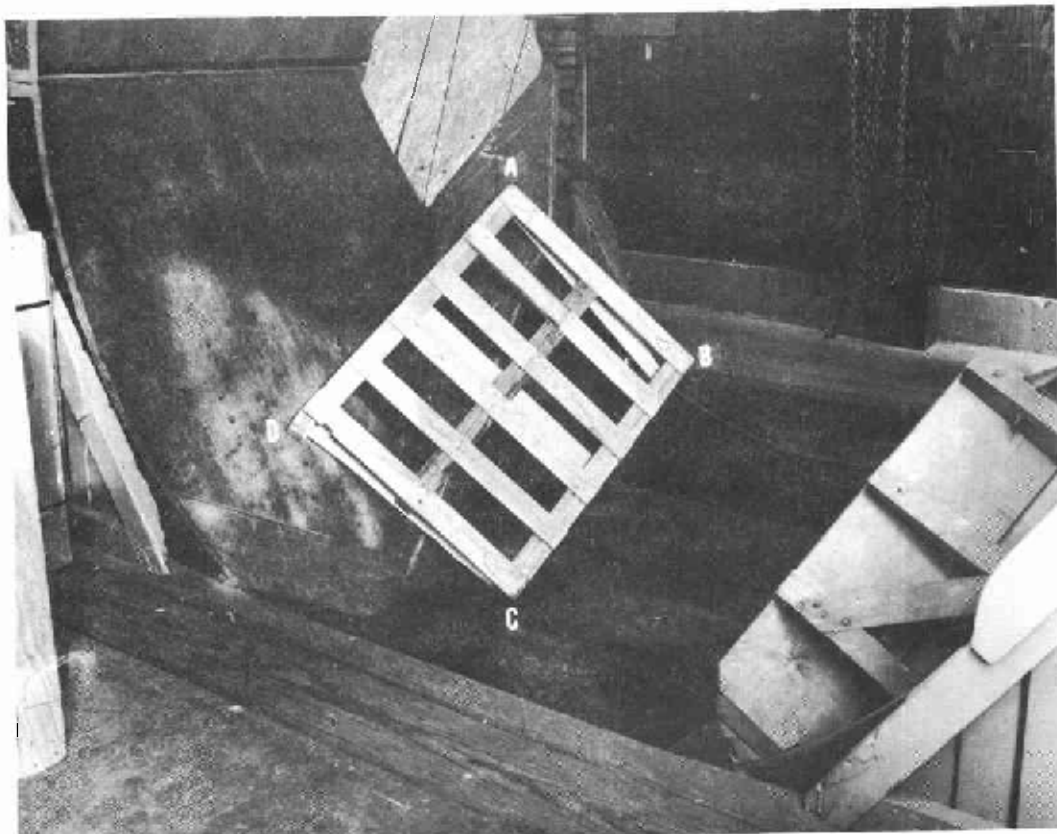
Typical failure of a four-way entry pallet in the revolving drum; the corner post (D) separated from the top deck.
